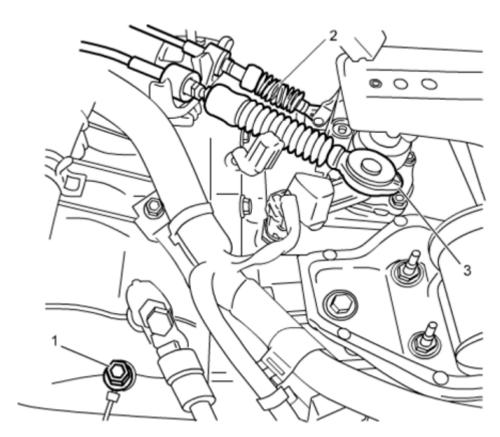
Identifying CVT Fluid Cooler No. 1 And 2 Hose Courtesy of SUZUKI OF AMERICA CORP.
